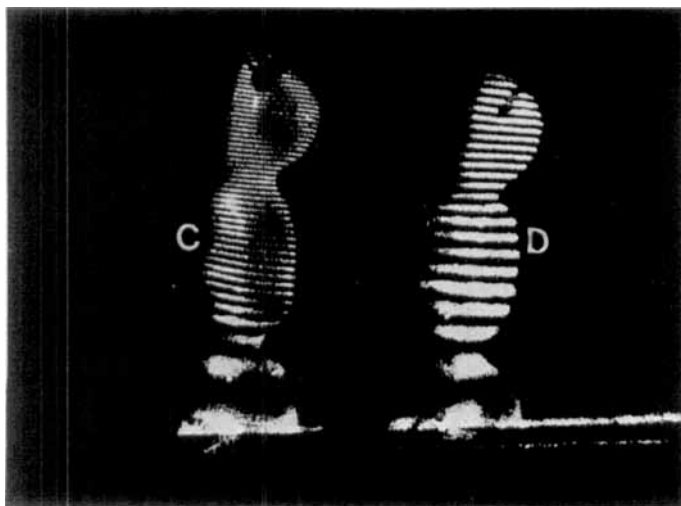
The influence of dimensions of the soldered joint on the elastic deformation. The hologram demonstrated a less deformation of construction D than in C. The soldered joints of D had larger dimensions but with defects.
